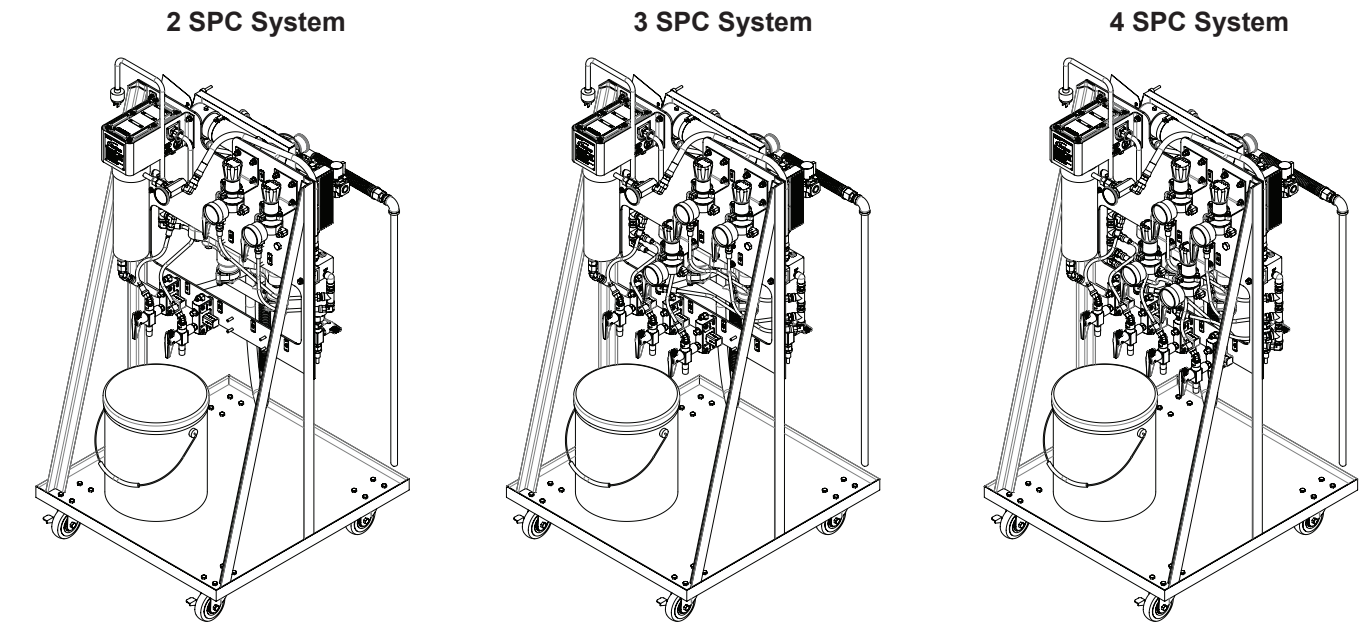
CP Pump Cart Assemblies with Spray Pressure Control
